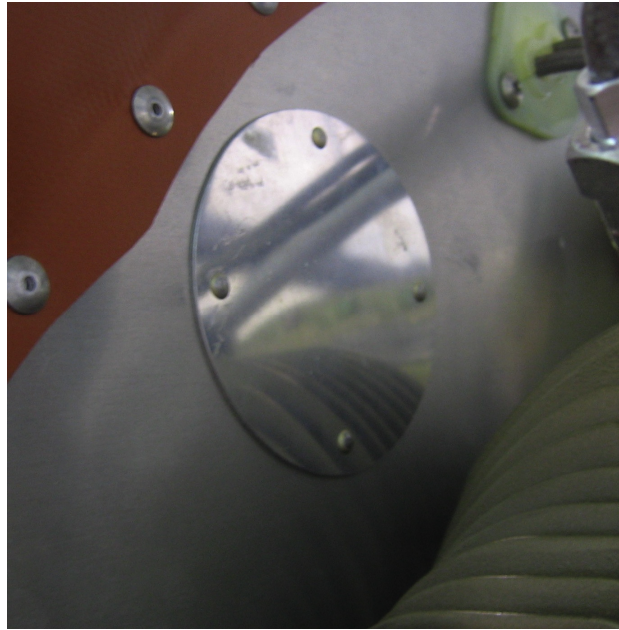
Cabin Heat Intake Flange Blank on Aft Baffle
